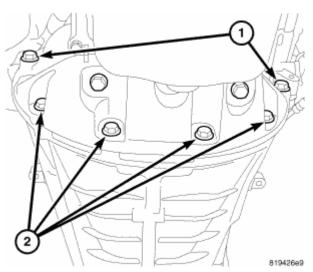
Power Steering Pump Mounting Bolts Courtesy of CHRYSLER LLC
